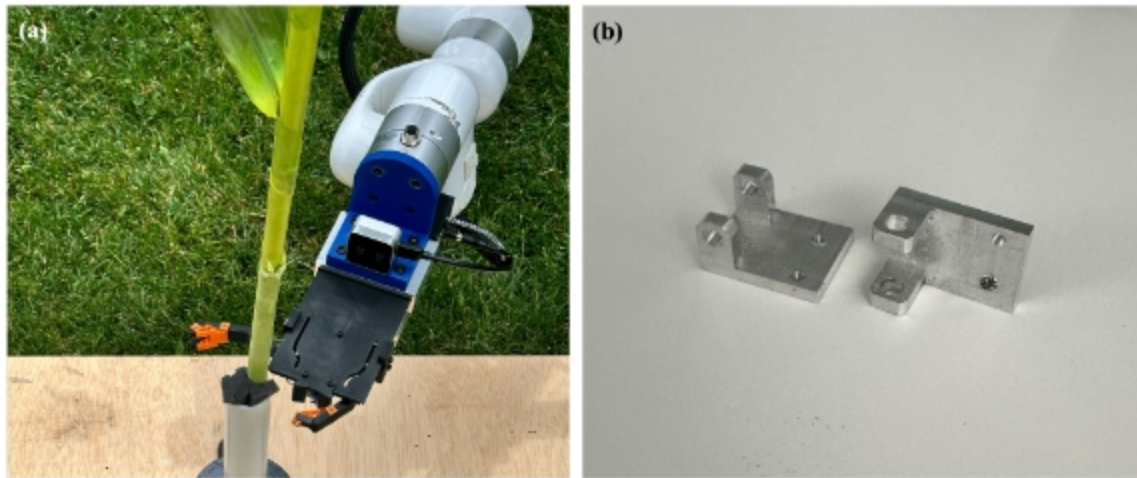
Gripper Fabrication: (a) Gripper finger bracket failing during testing (b) Metal fabricated finger bracket
